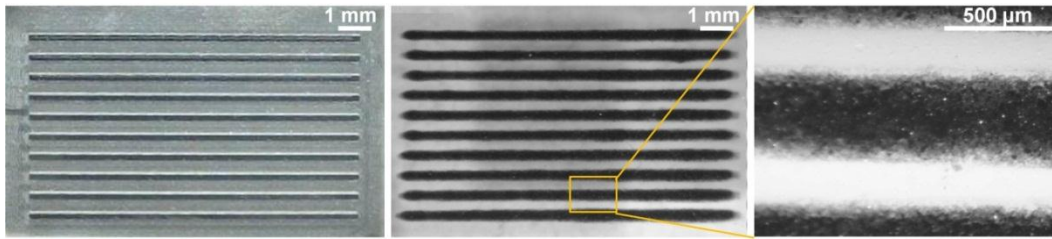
Photographs of the sample mold and the embedded patterns: (a) a picture of the PMMA printing mold made through micromachining; (b) a microphotograph of the PDMS sample with 10 embedded line patterns transferred from the PMMA mold, and (c) a magnified section of the embedded pattern.
